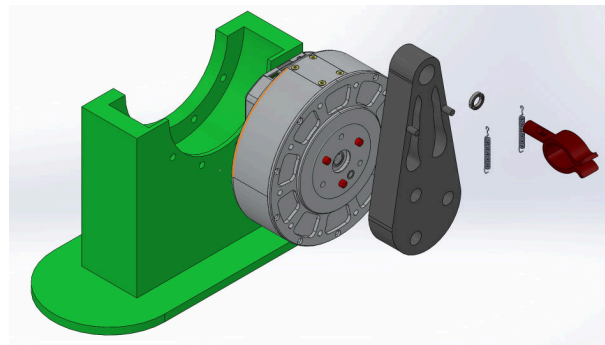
Each part of the robot used for prototyping the robot: base, servo motor, link, gripper, springs and ball bearing.
